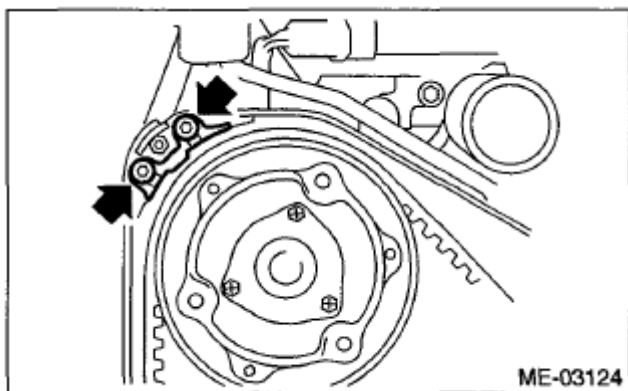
Locating Timing Belt Guide Mounting Bolts (2 Of 4)
